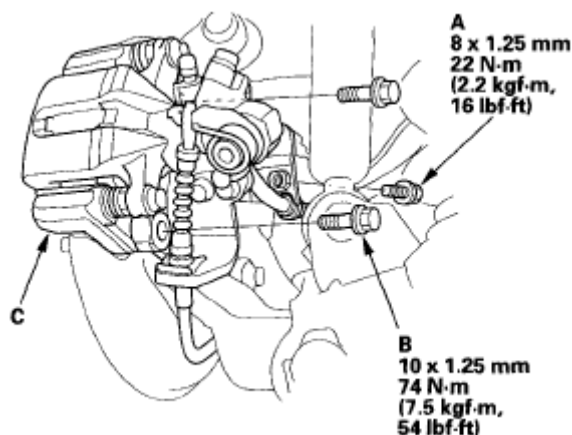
Identifying Brake Hose Bracket Mounting Bolt From Knuckle (With Torque Specifications)
